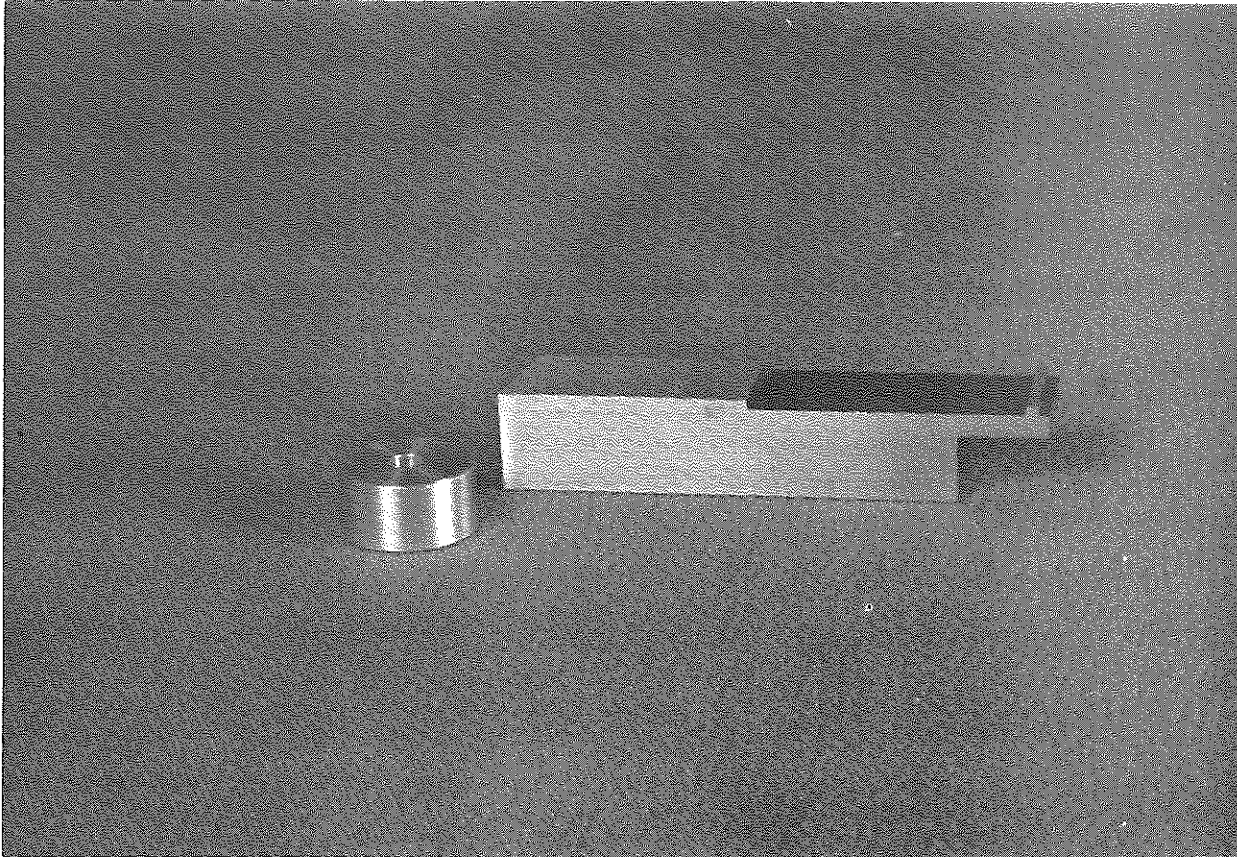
TAPE GUIDE ADJUSTMENT BLOCK AND PRESSURE ROLLER ADJUSTMENT GUIDE
